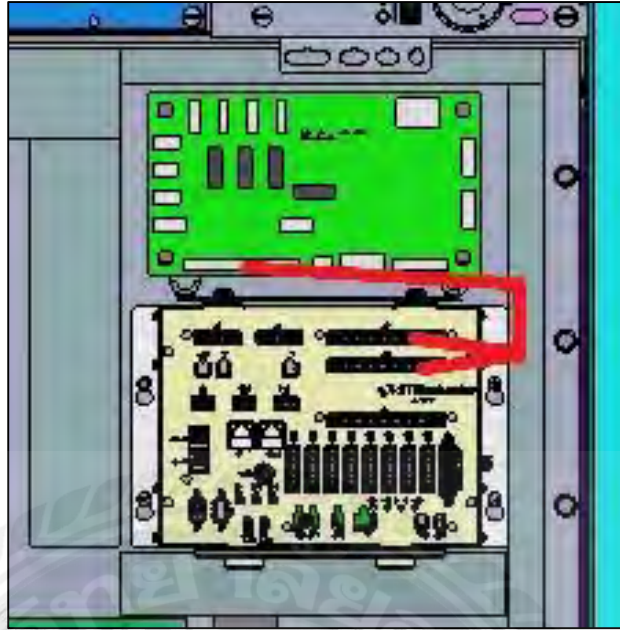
Cable Routing for STE 9812-3020 REV00
